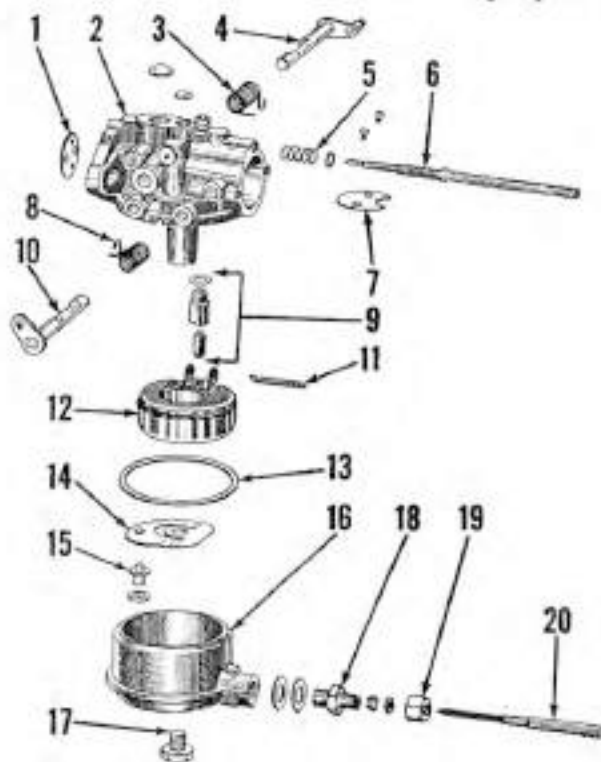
Exploded view of Carter N type carburetor used on early models.
